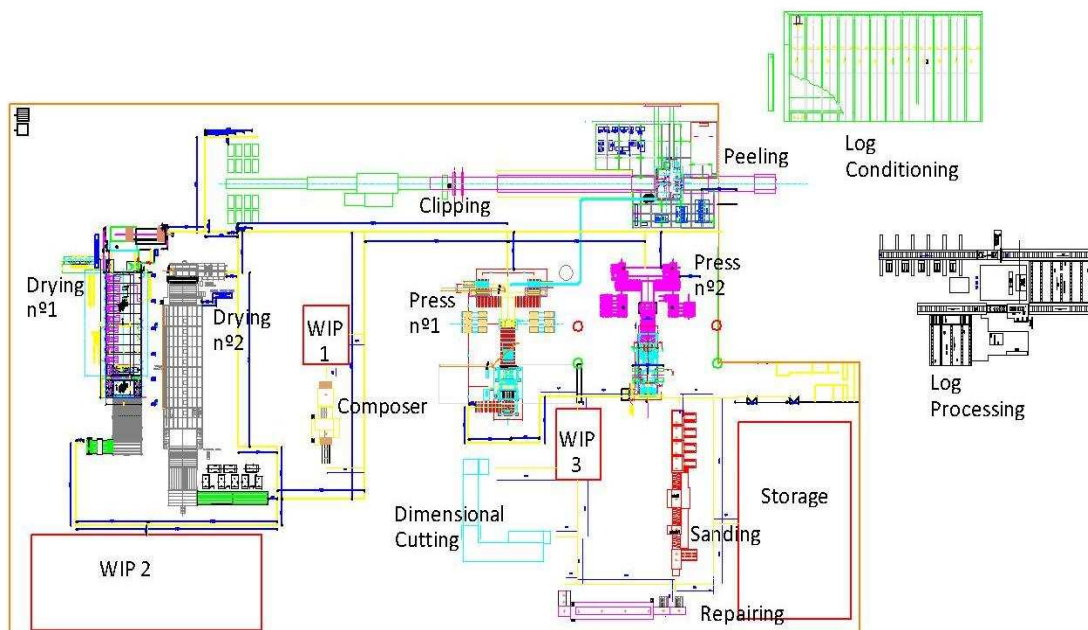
Plant layout alternative 1. Source (modified): Urupanel.
